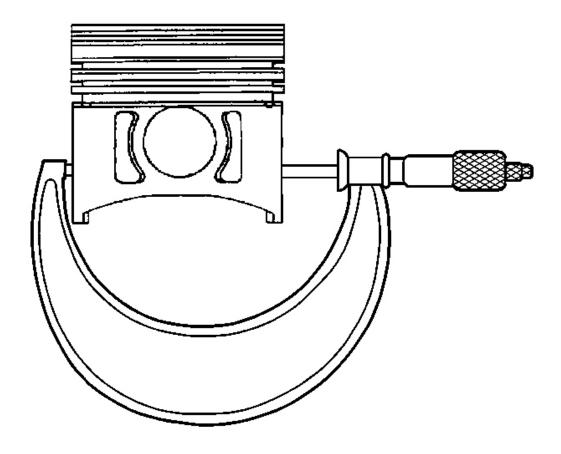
Measuring Piston Outside Diameter Using Micrometer Courtesy of GENERAL MOTORS CORP.
